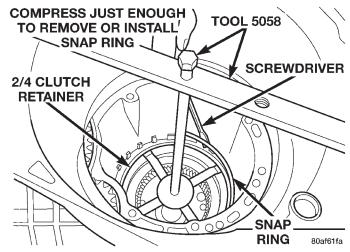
Install 2/4 Clutch Retainer Snap Ring
